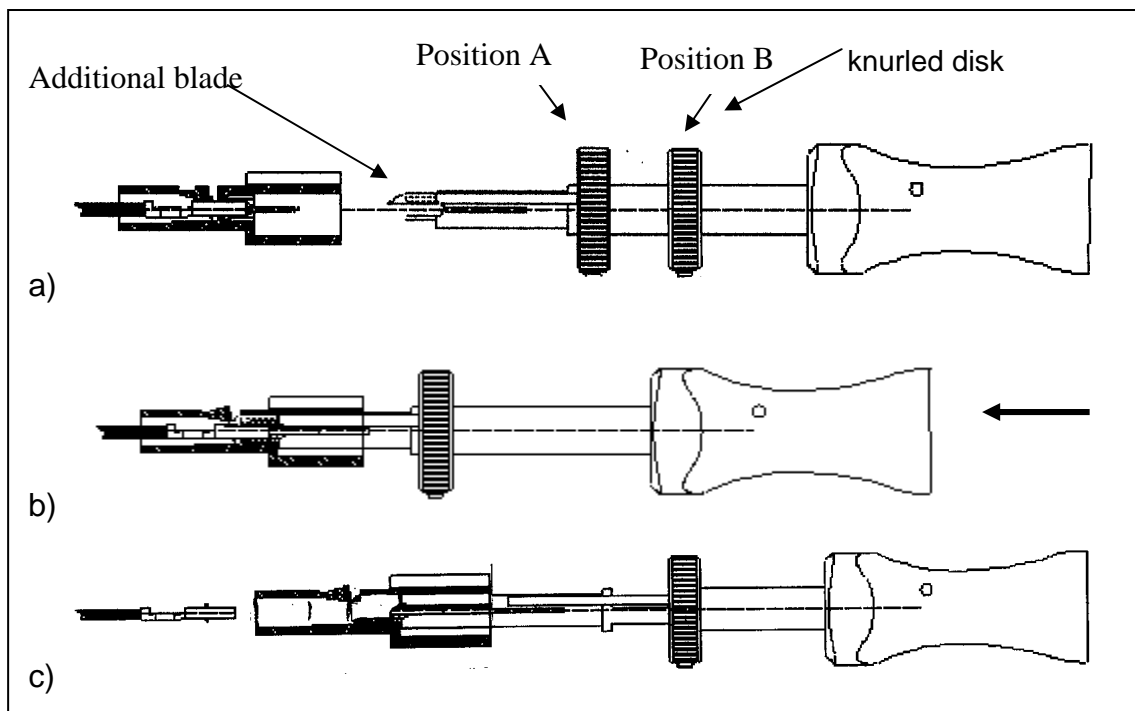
Unlocking with the tool 2 72 00 54405 0
